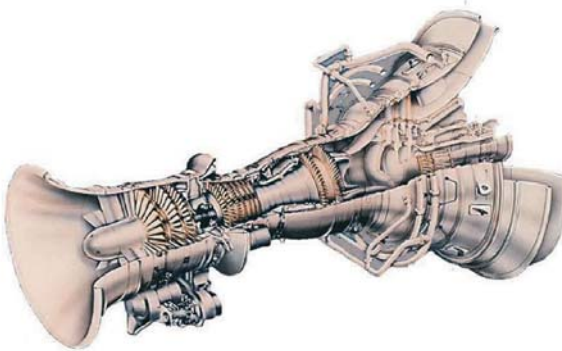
GE Aerospace LM1600 engine with axial-type inlet device [13]
